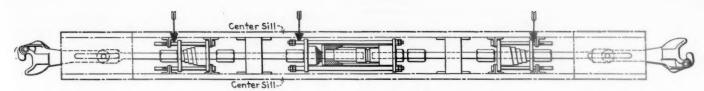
schematically illustrates the construction and method of attachment of the Alma gear to the car underframe. The continuous rod A consists of two rod sections. Each section is connected on one end with
